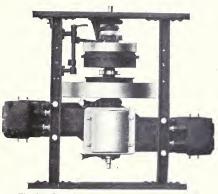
Two-Cylinder Opposed Engine of Reo Car. Reo Motor Car Company, Lansing, Mich.
